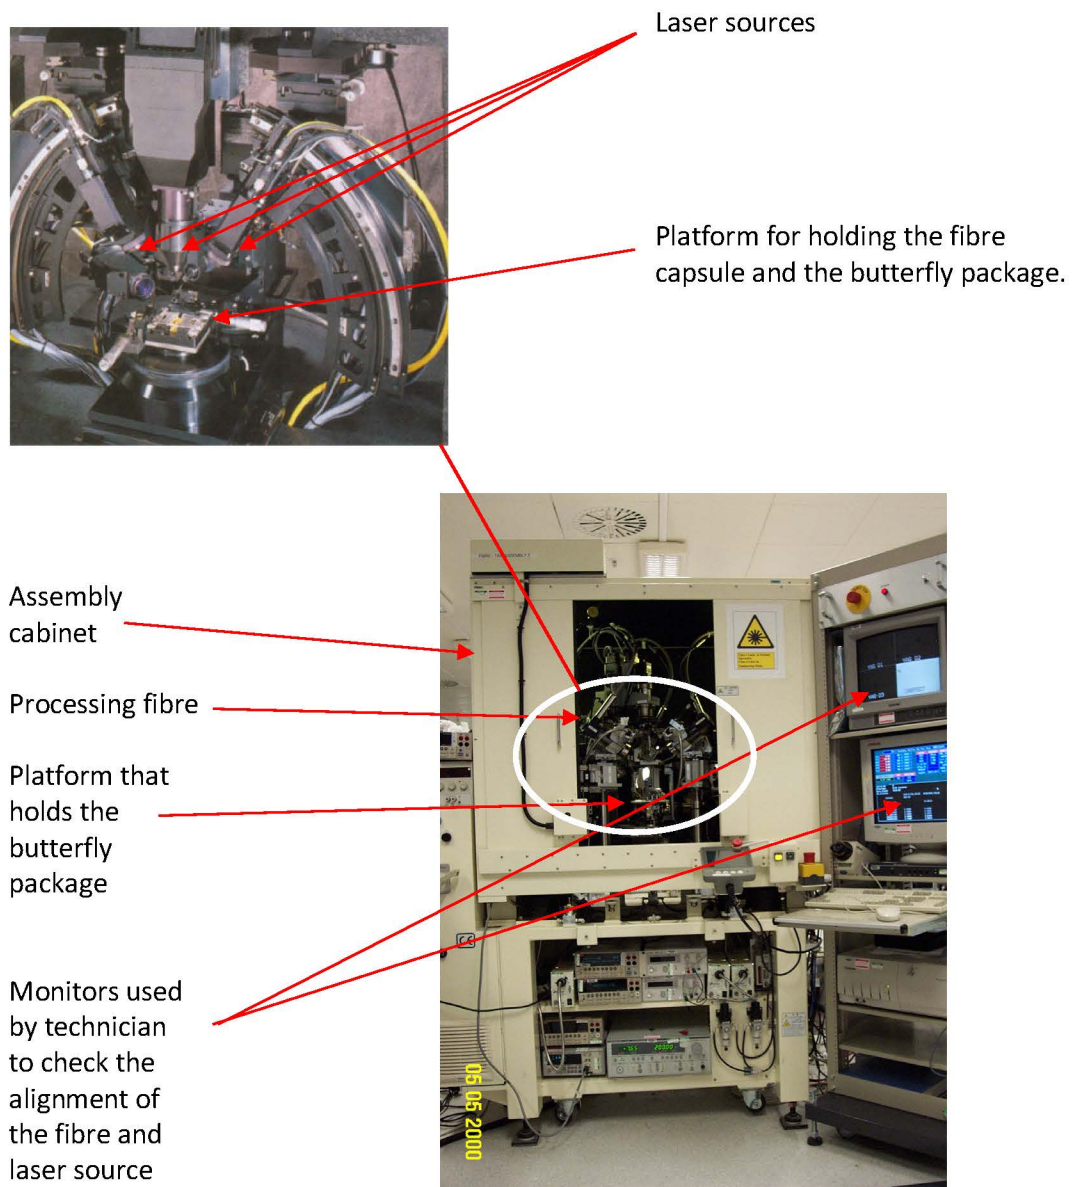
Laser welding station (picture courtesy of Oclaro).
